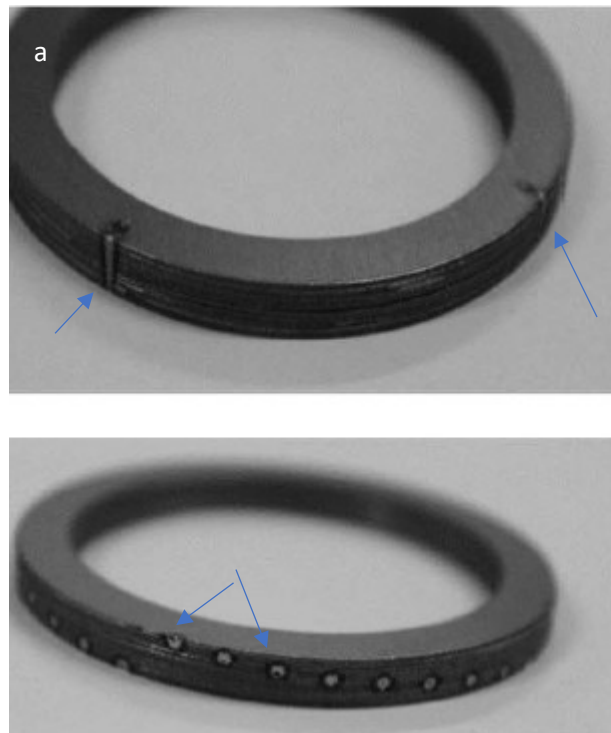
Welding joint (a) Linear welding line (b) Laser Spot Welding (Leuning et al., 2017, p. 2).
